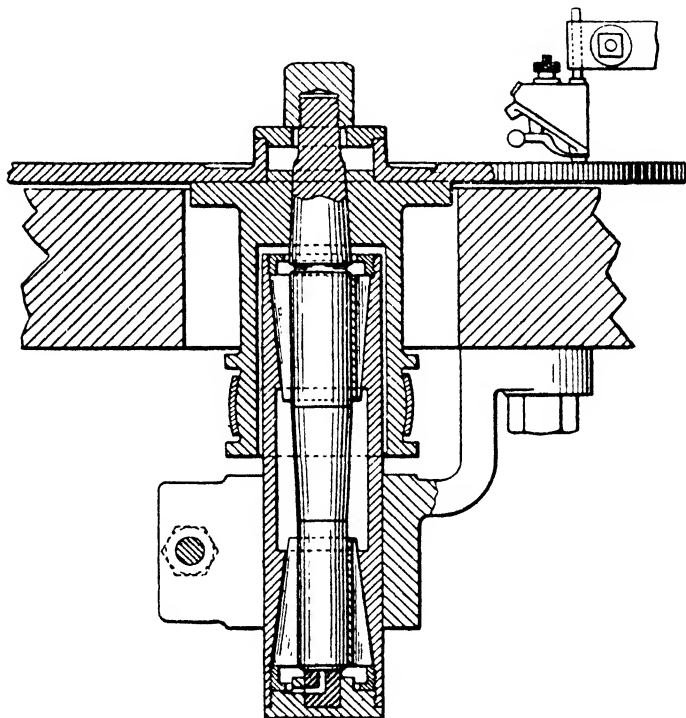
Design of Whitehead for a scribe supported in two plain bearings below the table
